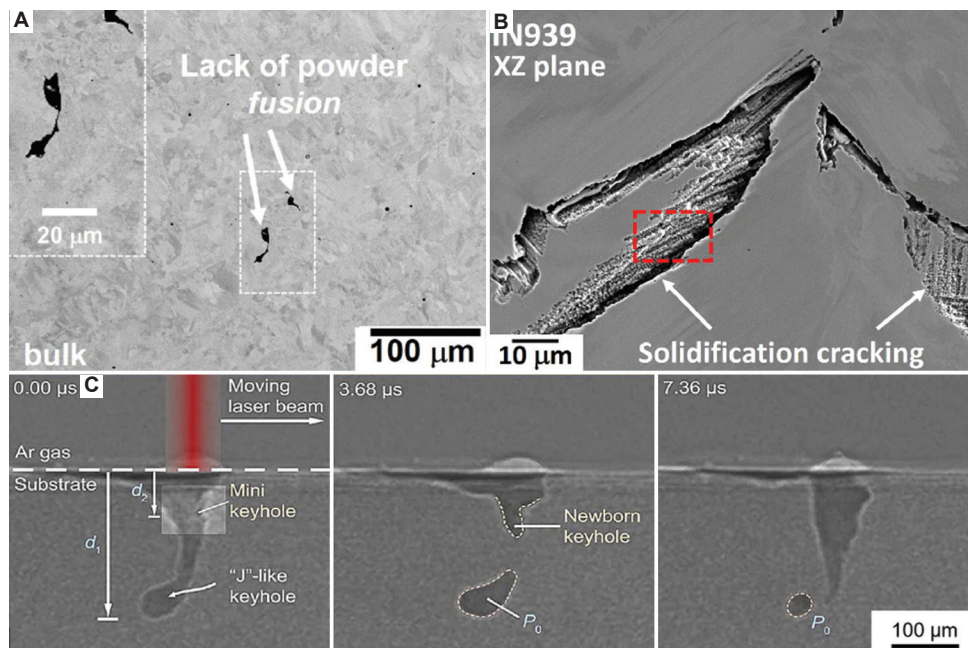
Common defects in additive manufacturing. (A) Lack of powder fusion; (B) Crack;⁹² (C) Formation of keyhole.⁹³
